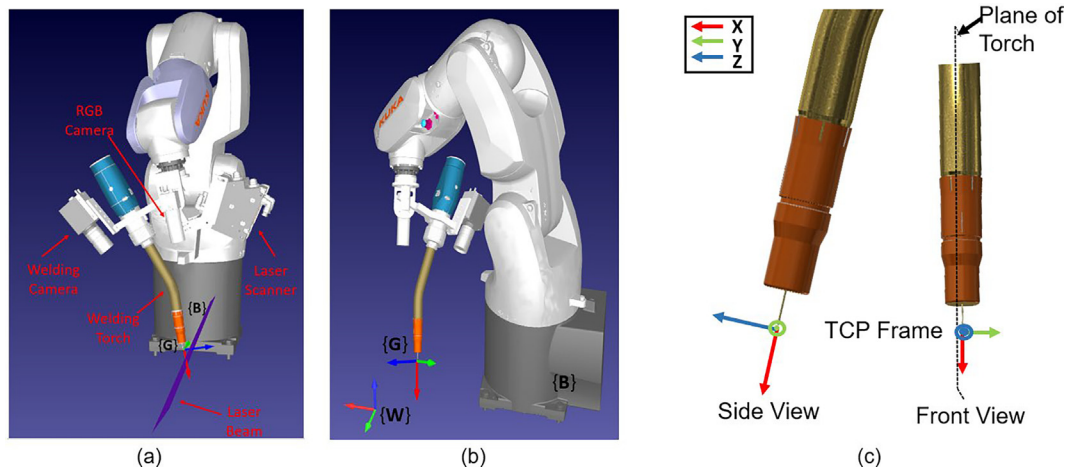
(a) Robotic setup consists of a welding camera, RGB camera, welding torch and laser scanner, (b) Front-view showing the specimen's frame {W} relative to gripper {G}, (c) TCP calibration of the welding torch.
